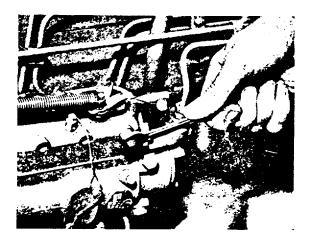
Slackening Air Vent Valve on Governor Control Cover.
